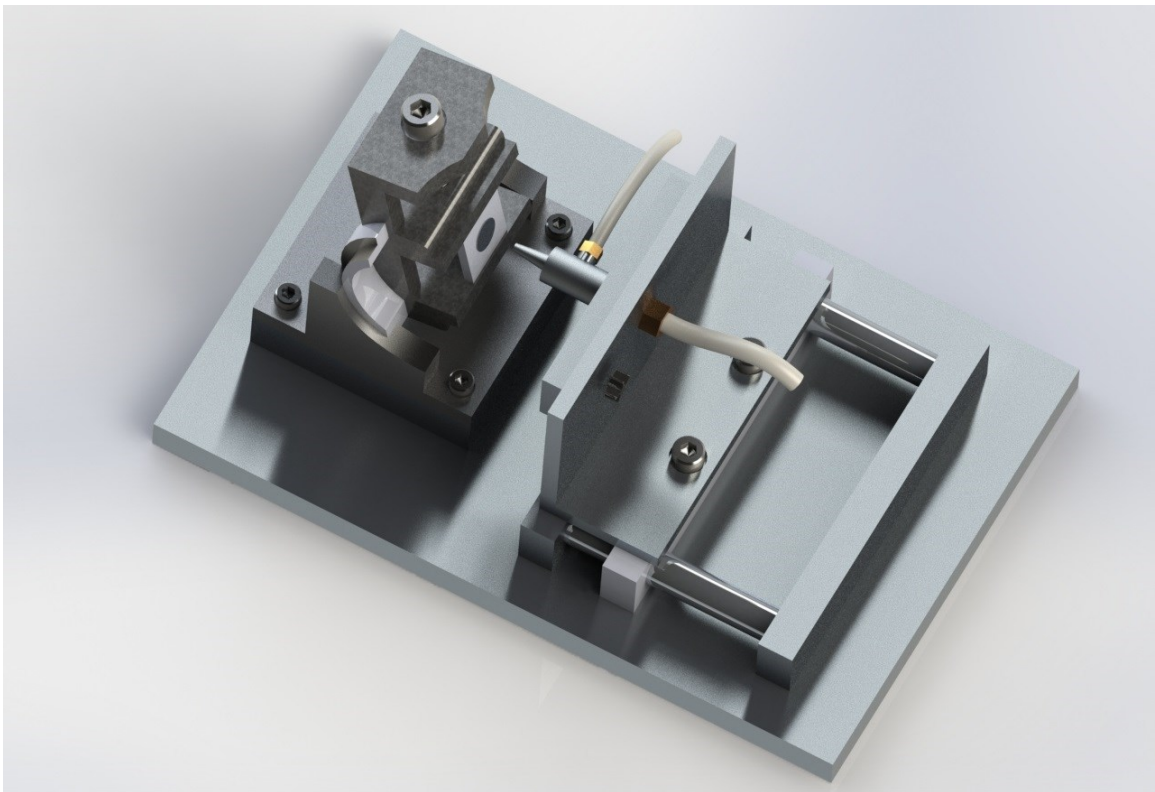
Isometric view of erosion sample holder (SolidWorks).
